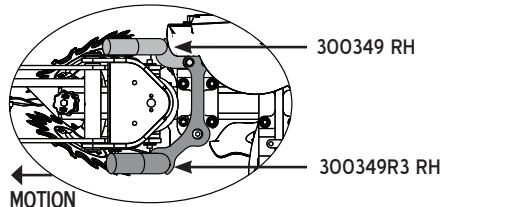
2.5" Incorporating Dry Fertilizer Tubes Top View
